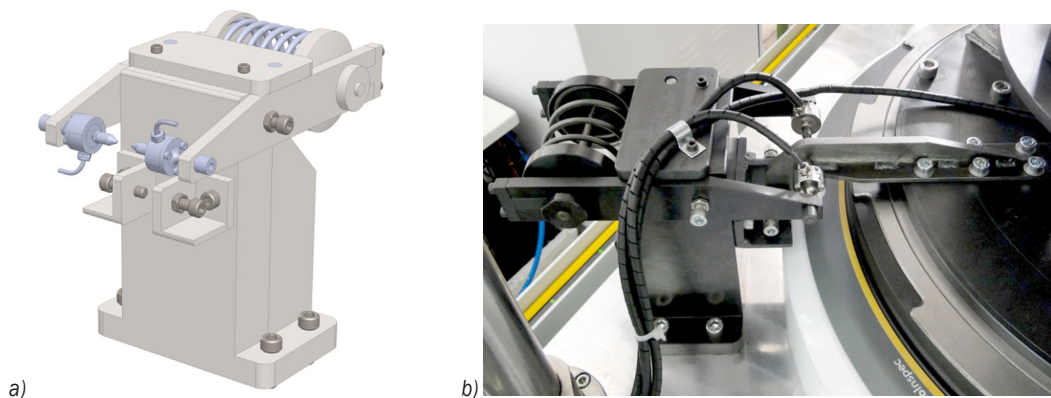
a) Model of the torque measuring unit, and b) measurement of the friction torque
